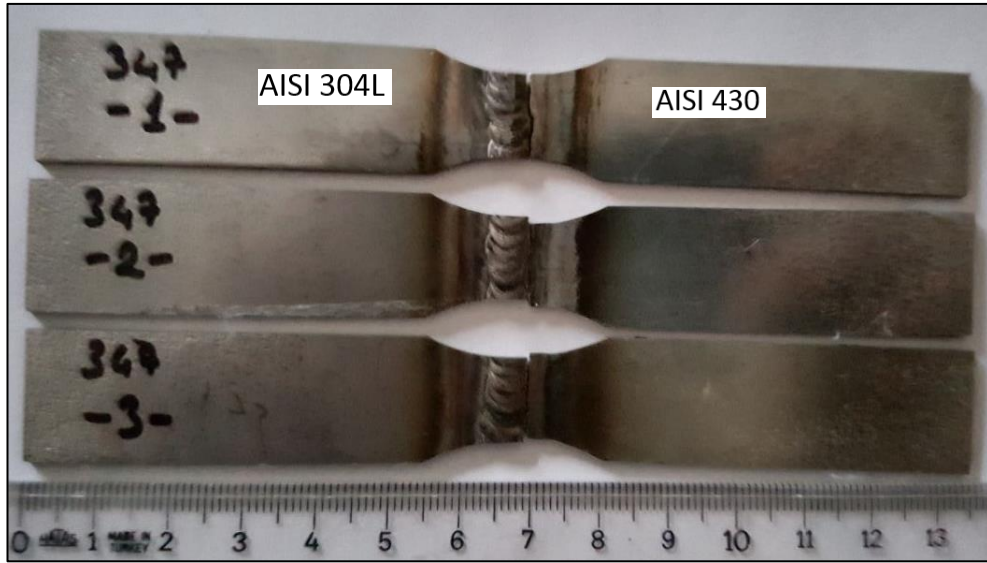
Macro photographs of the refraction areas of the Standard B welded tensile specimens combined with ER347 additional wire.
